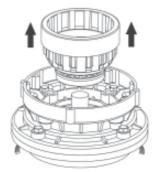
I - Disassembly of the drive magnet assembly
